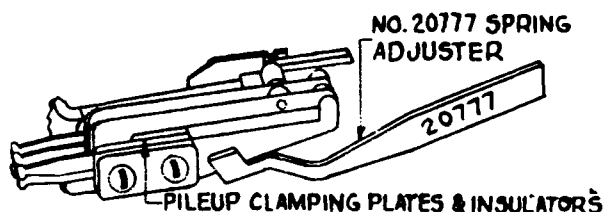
ADJUSTING SPRINGS TO MEET GAUGING REQUIREMENTS
